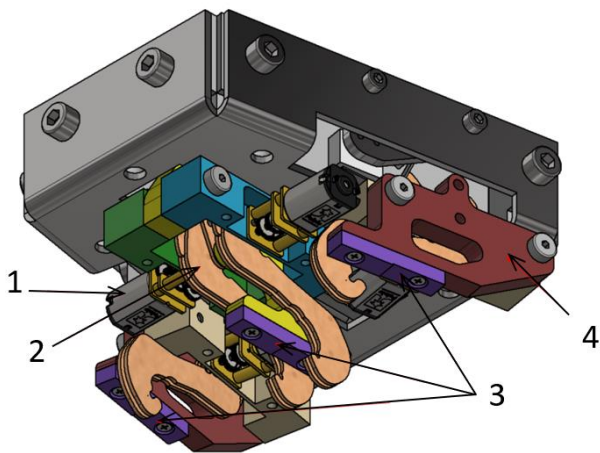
Mechanical design of the LAR-MG. 1- DC Gearmotor, 2 – central tentacle arm, 3 – hardstops, 4 – side tentacle unit.
